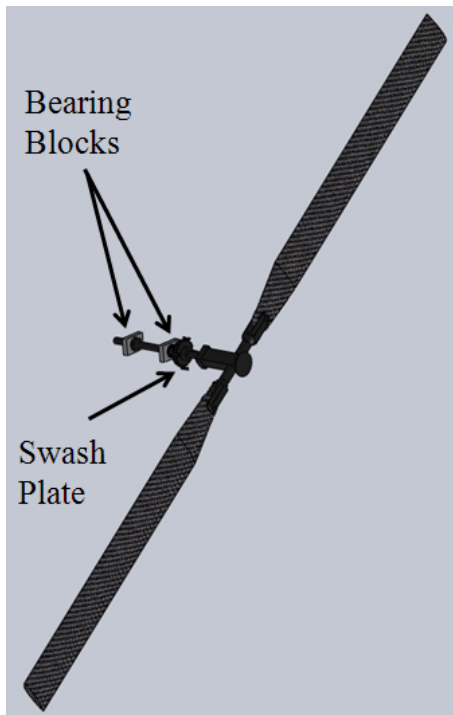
CAD drawing of the variable pitch propeller with its swash plate and bearing blocks.
